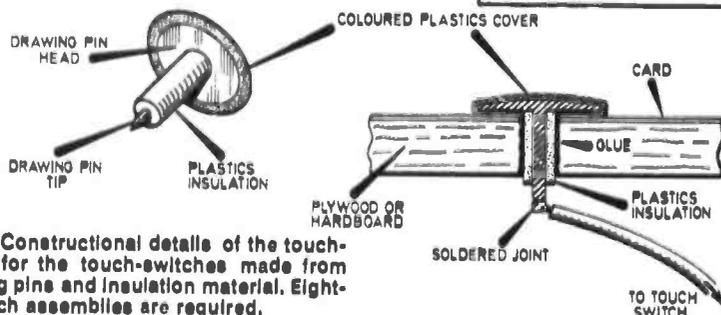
Constructional details of the touch-plates for the touch-switches made from drawing pins and insulation material. Eighteen such assemblies are required.
